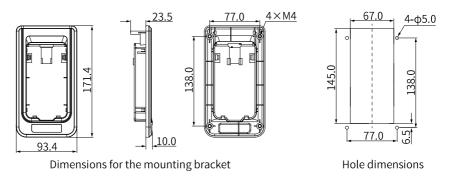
Base mounting bracket dimensions and hole sizes (mm) of the MDKE-10
